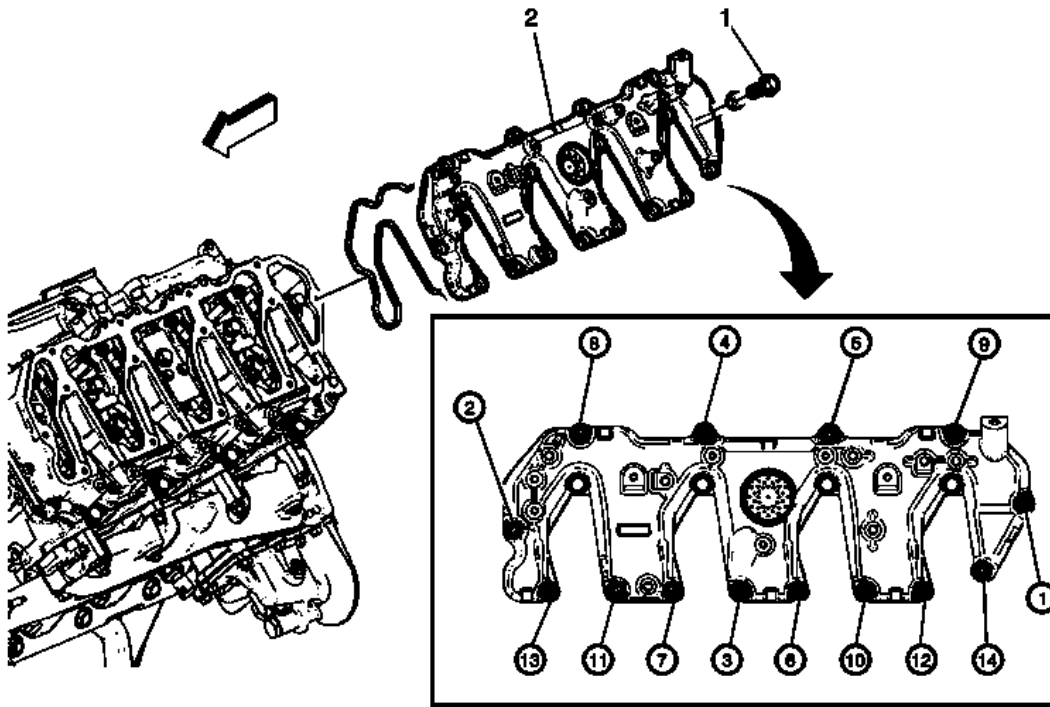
Valve Rocker Arm Upper Cover And Fasteners With Tightening Sequence - Left Side
